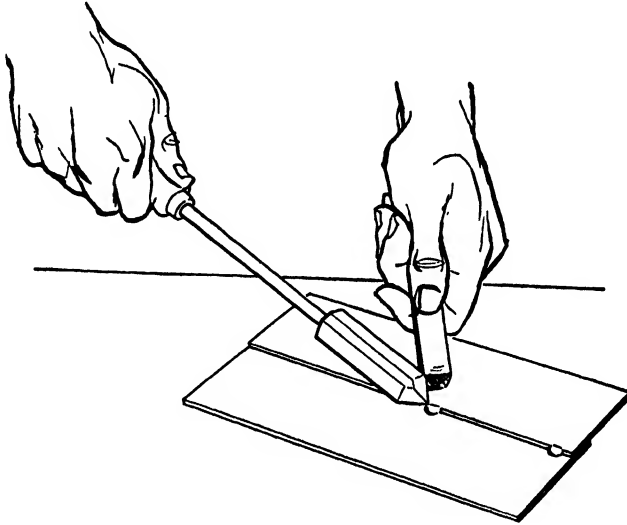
In soldering a lap joint, it is best first to "tack" the pieces at intervals and then solder the remainder of the seam.
